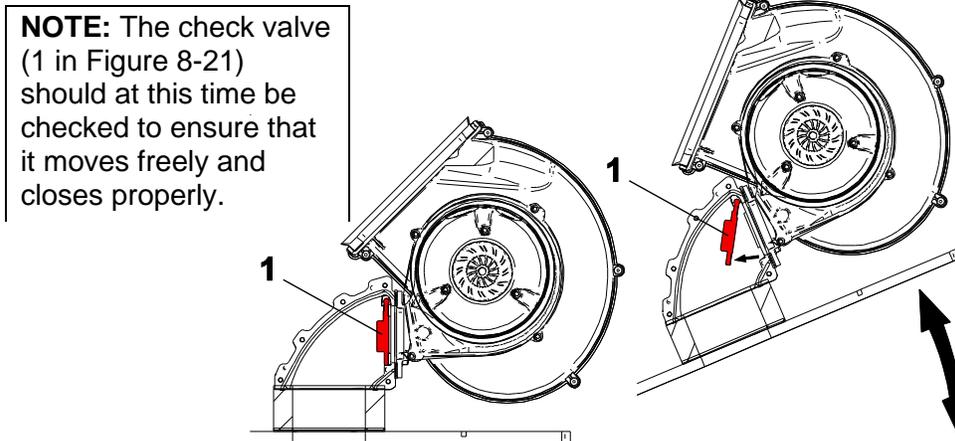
Lifting Burner Assembly and Location of Check Valve (Step 16)
